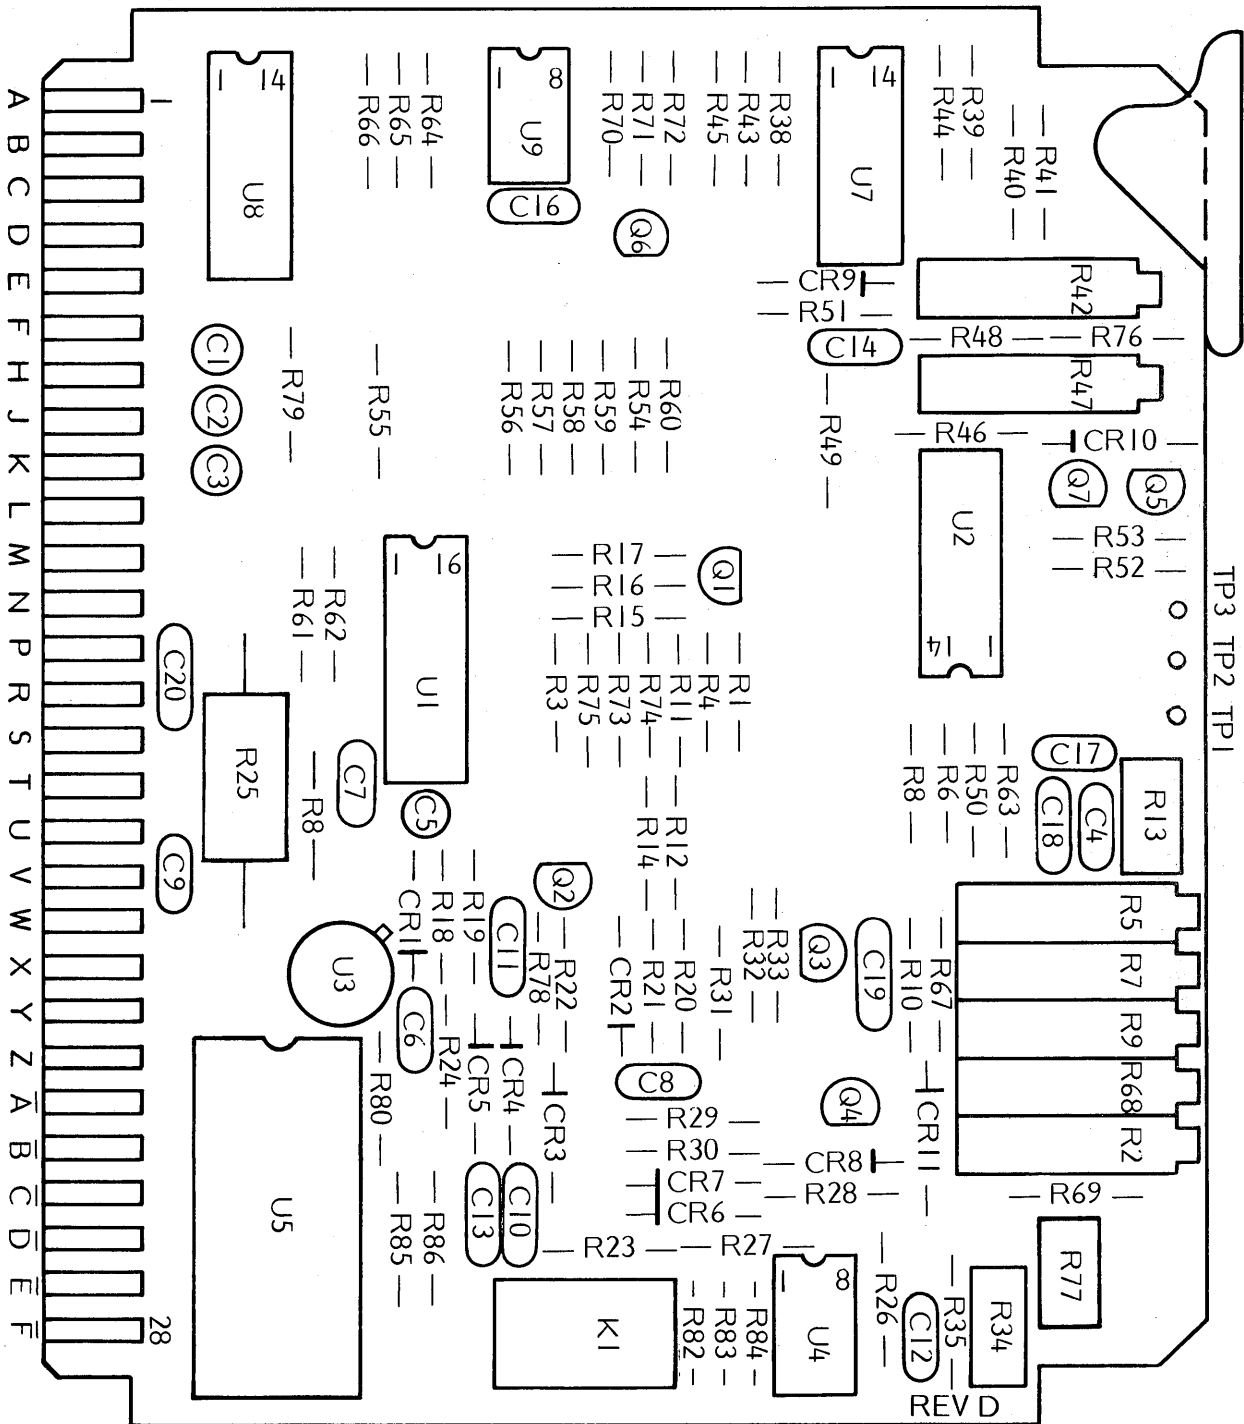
A6 YIG Driver PCB, Assy 660-D-8190, Schematic (Sheet 1 of 3)
